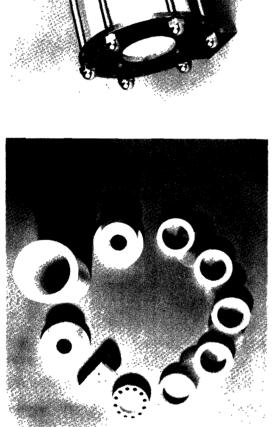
Top View Diffuser Components: Housing, End Sections, Spiraler Tube, Teflon Screens, Retaining
